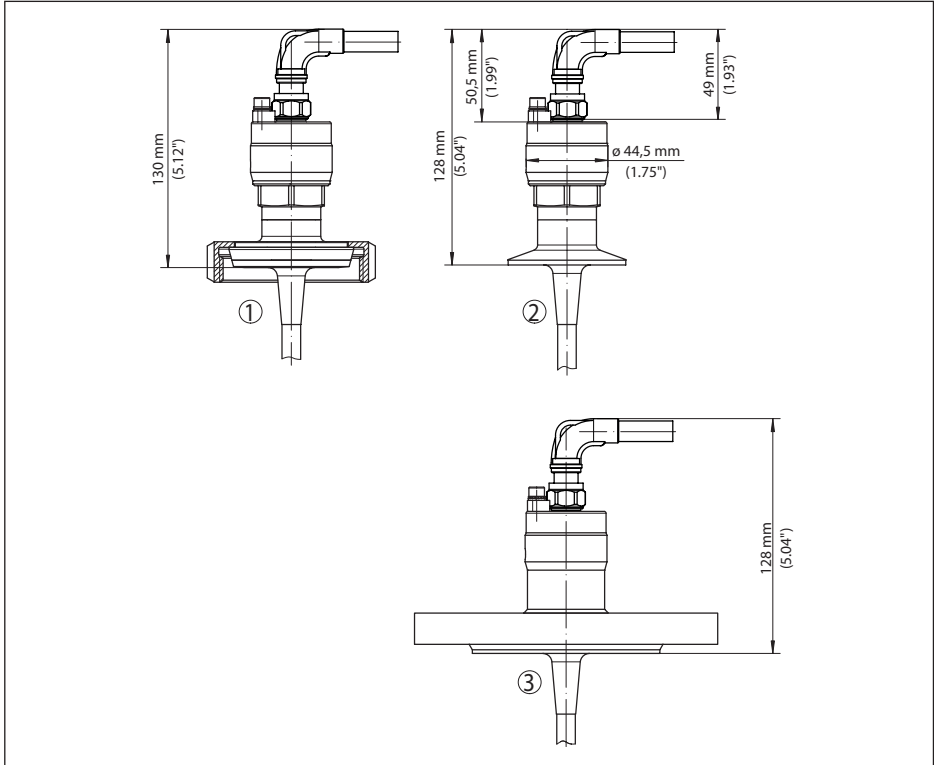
Sensor housing VEGAFLEX 83 - PFA plated
